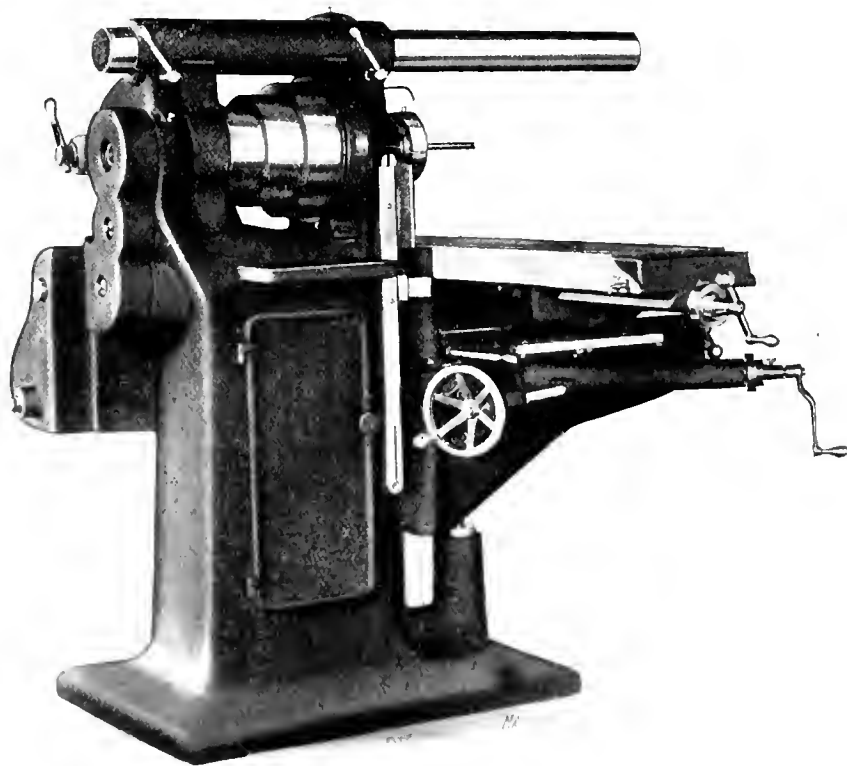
Side View, showing Arrangement of Adjusting Handwheels and Cranks
